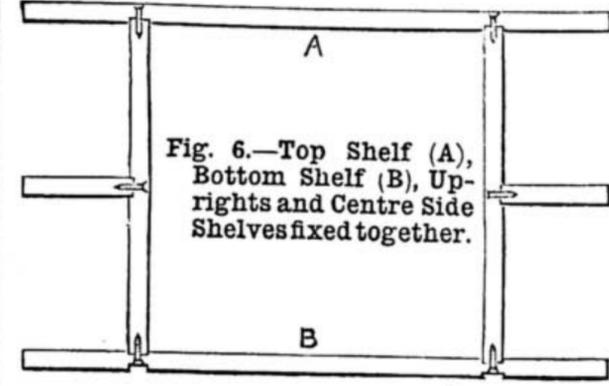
Top Shelf (A), Bottom Shelf (B), Uprights and Centre Side Shelves fixed together.
